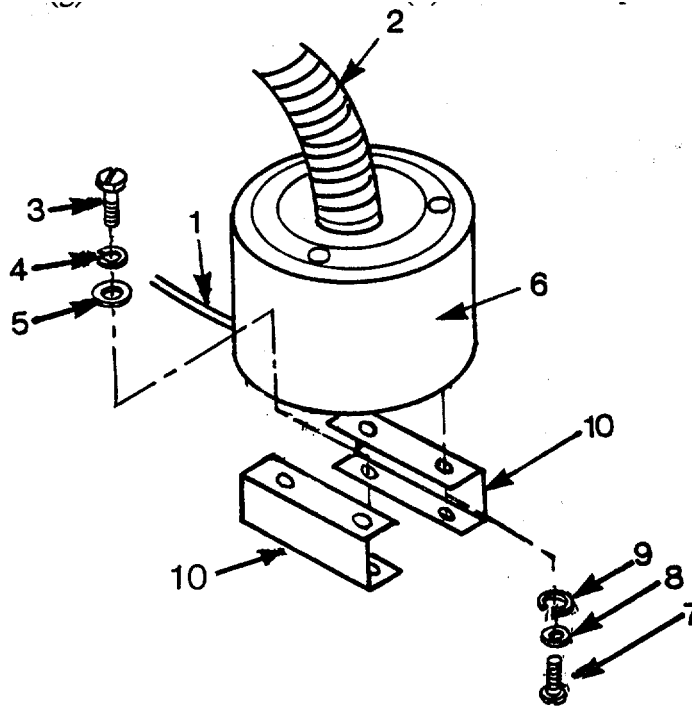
Vertical Camera Vacuum Pump Assembly
